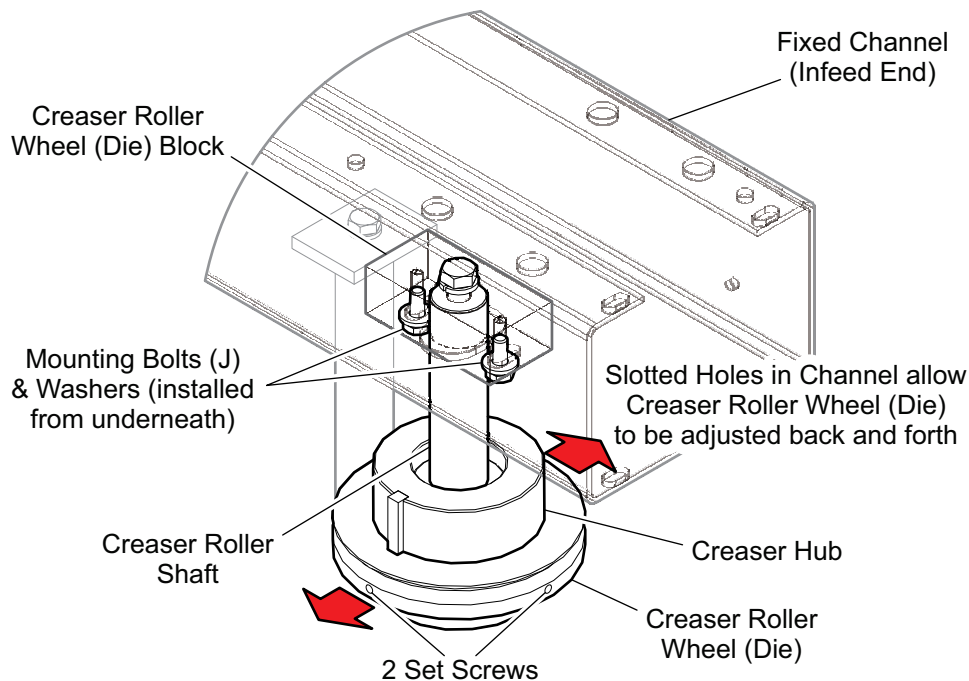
Creaser Roller Wheel (Die) Block Hardware
